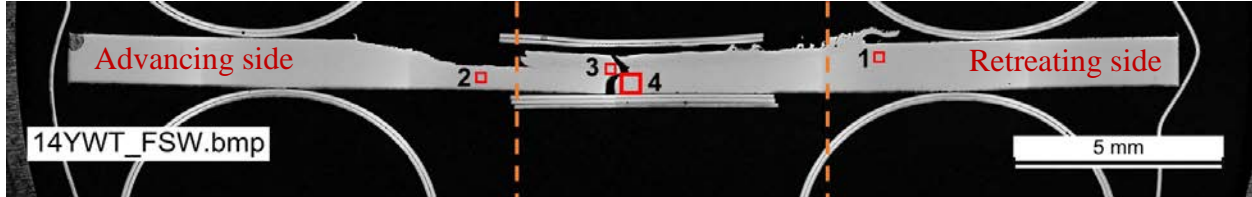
Composite of several optical micrographs showing the butt joint produced by friction stir welding in the 1.0 mm thick plate of 14YWT.
